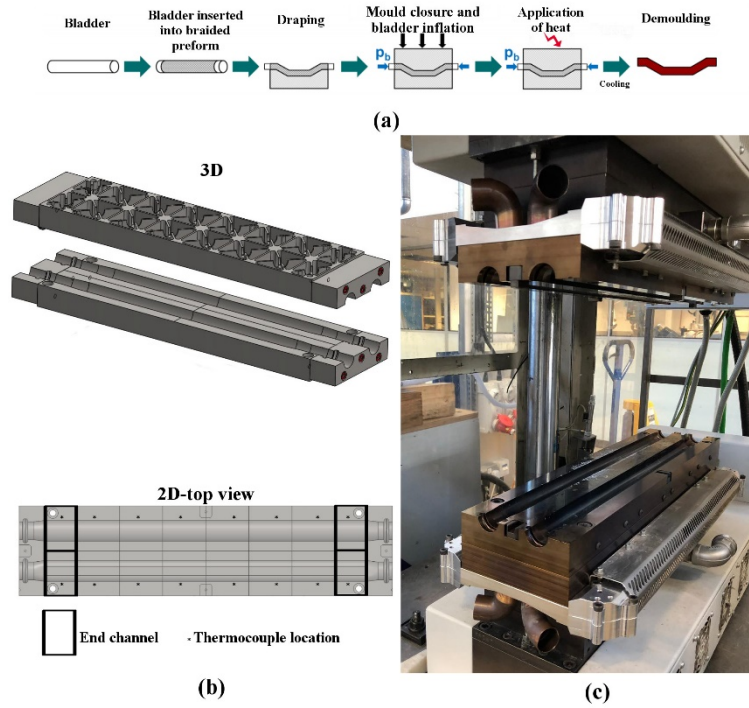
(a) Step-wise illustration of BIM process (Adapted from [31]); (b) Schematic of the RVM tool faces showing segregated channels & (c) Customized tool face with the PtFS setup mounted onto the press
